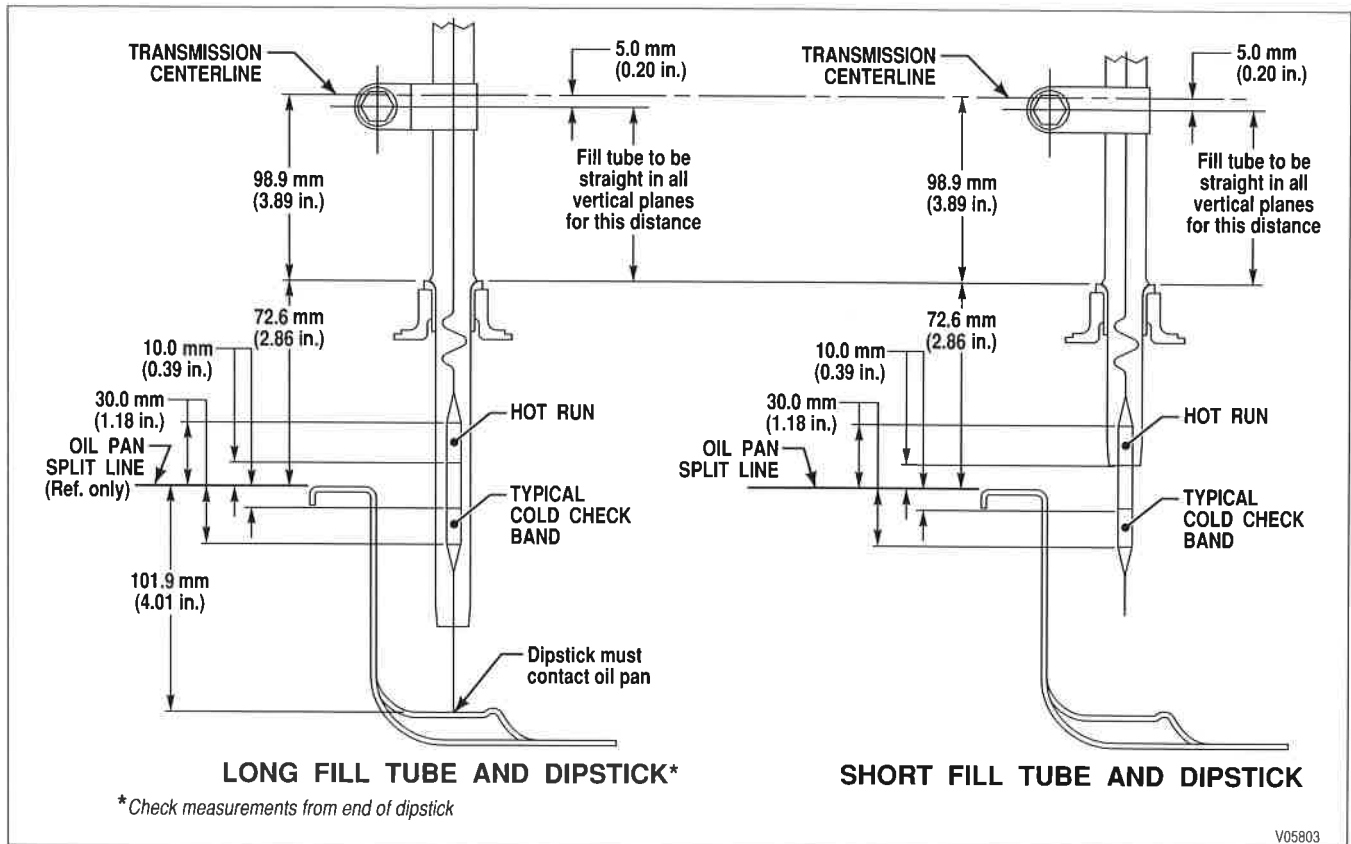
Fill Tube And Dipstick Requirements (Standard Oil Pan)
